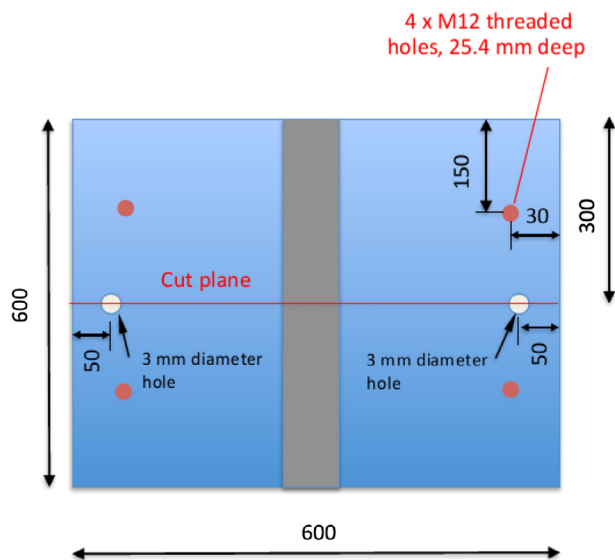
Dimensions of the welded mock-up showing the location of the contour cut plane and pilot holes. The drawing is not scaled and all dimensions are in millimetres.
